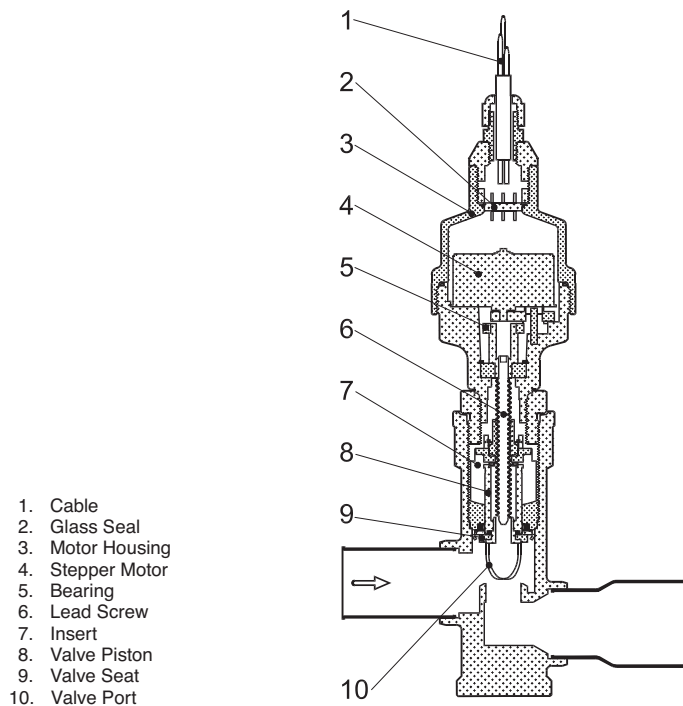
Cutaway View of the Electronic Expansion Valve
